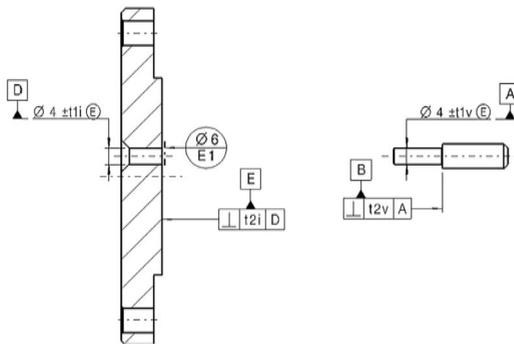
CLIC table for positioning the pivot (V) with its corresponding ISO dimensioning
